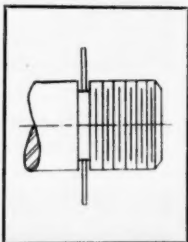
This sketch shows how a round thin washer screwed on the threads of the latch screw may be used as a retainer.
